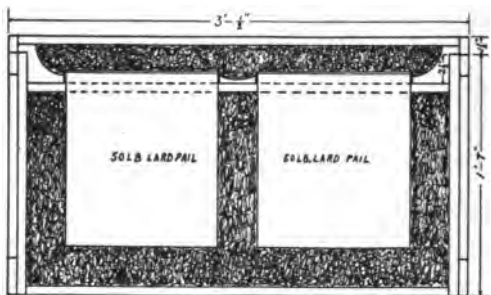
Fireless cooker. Sectional view on A-A, showing cover and packing.
